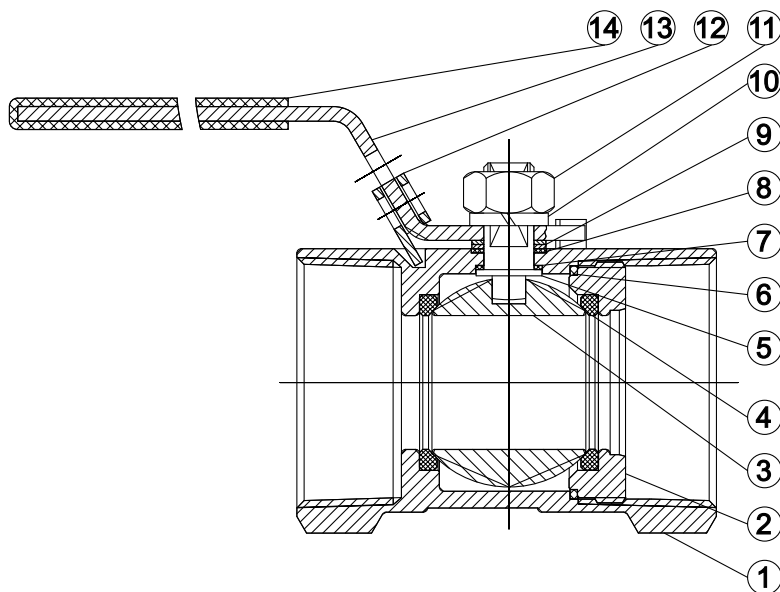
Sectional drawing of ECOLINE BLC-P1
